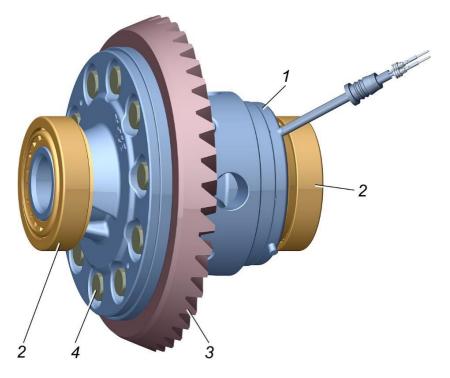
Locking differential complete with bearings and driven gear of the final drive: 1 - differential; 2 - bearings; 3 - driven gear; 4 - bolt
